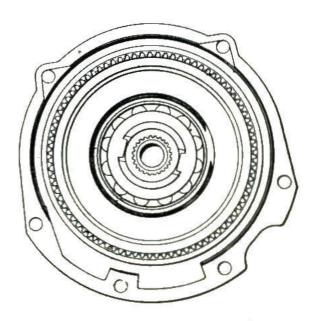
UNI-DIRECTIONAL CLUTCH IN POSITION
